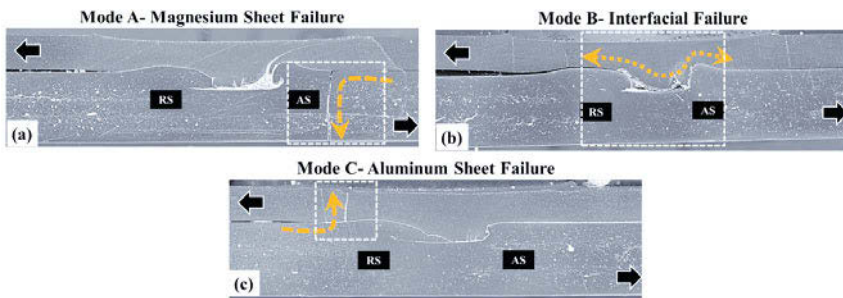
Cross-sectional views of representative failed coupons: (a) Mode A- magnesium sheet failure; (b) Mode B- interfacial shear failure; and (c) Mode C- aluminum sheet failure.
